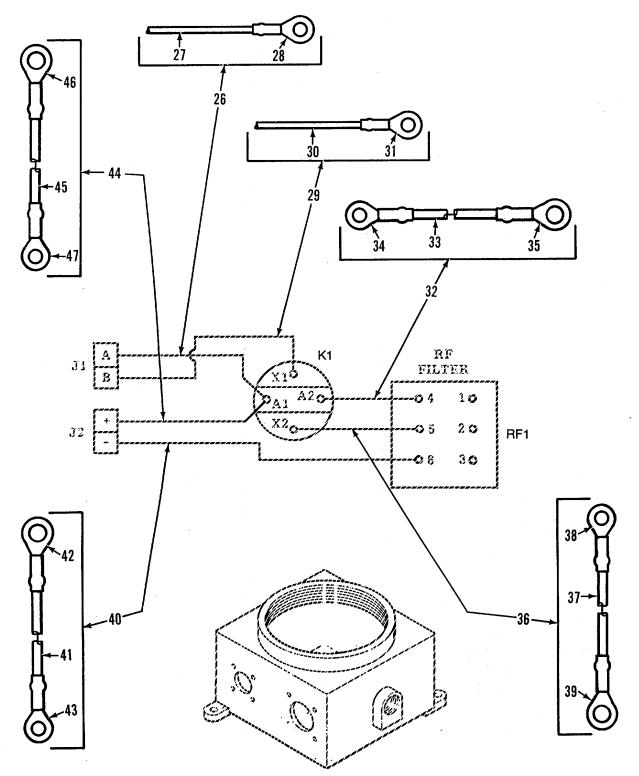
Junction Box Assembly (Sheet 2 of 2)
